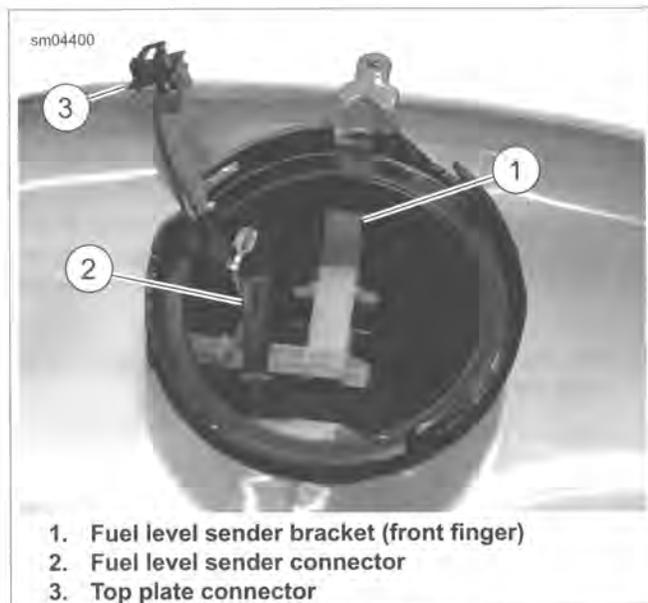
Front Finger (Fuel Level Sender Bracket)
